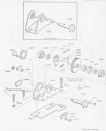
EXPLODED VIEW OF MECHANICAL ASSEMBLY WITH IDENTIFIED PARTS
